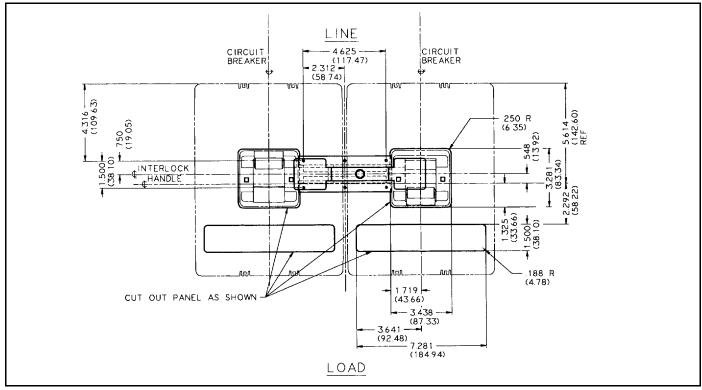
L-Frame Sliding Bar Interlock Installation Details
